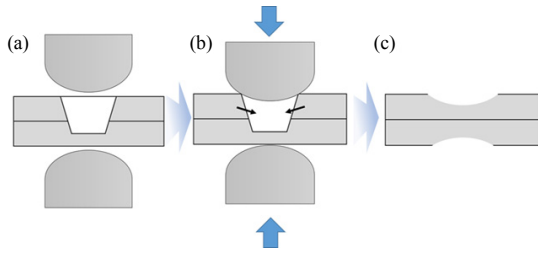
two-step refilling FSSW using additional resistance spot welding²⁴⁾
